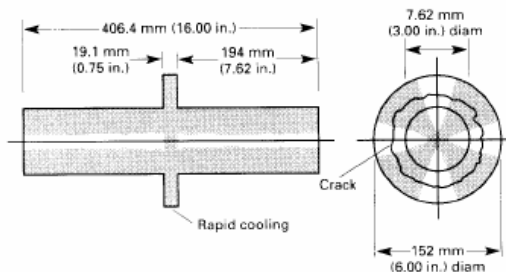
(b) The design of this steel flange on this shaft will cause the flange to crack during quenching. Source: Ref 23
